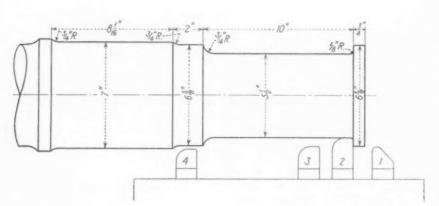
Arrangement of tools on right-hand carriage of center driven lathe to finish turn collar, journal, dust guard and wheel seat of 51/2 x 10 in. axle.
